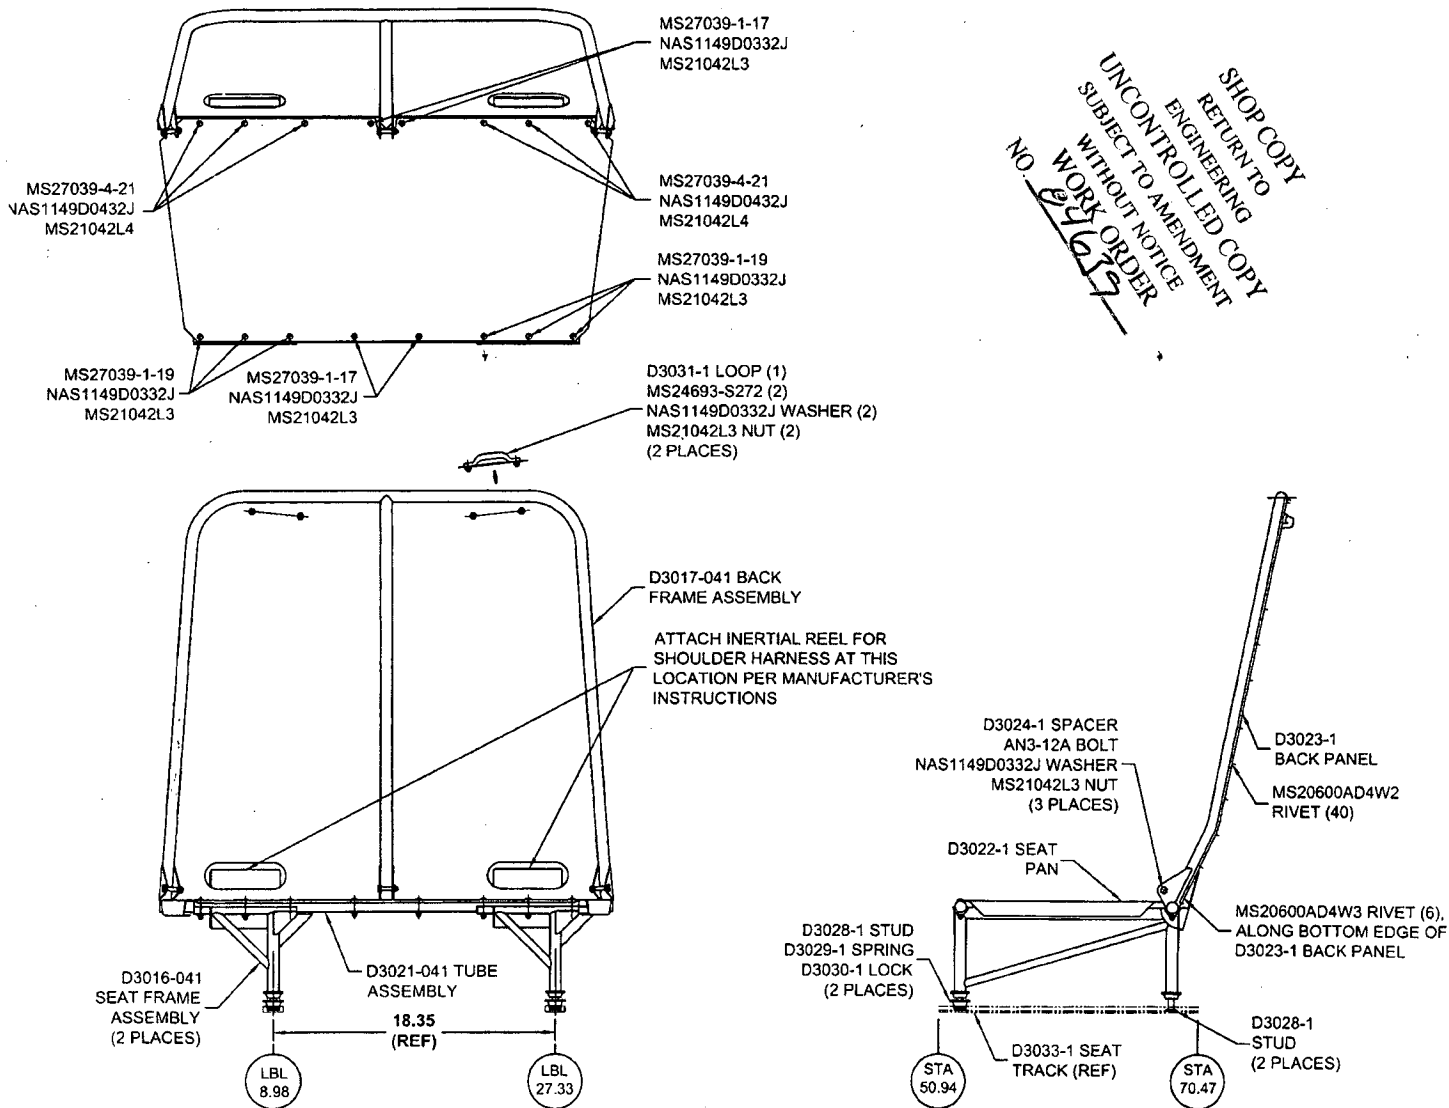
Installation of D350-689-041 Dual High Back Seat Assembly
